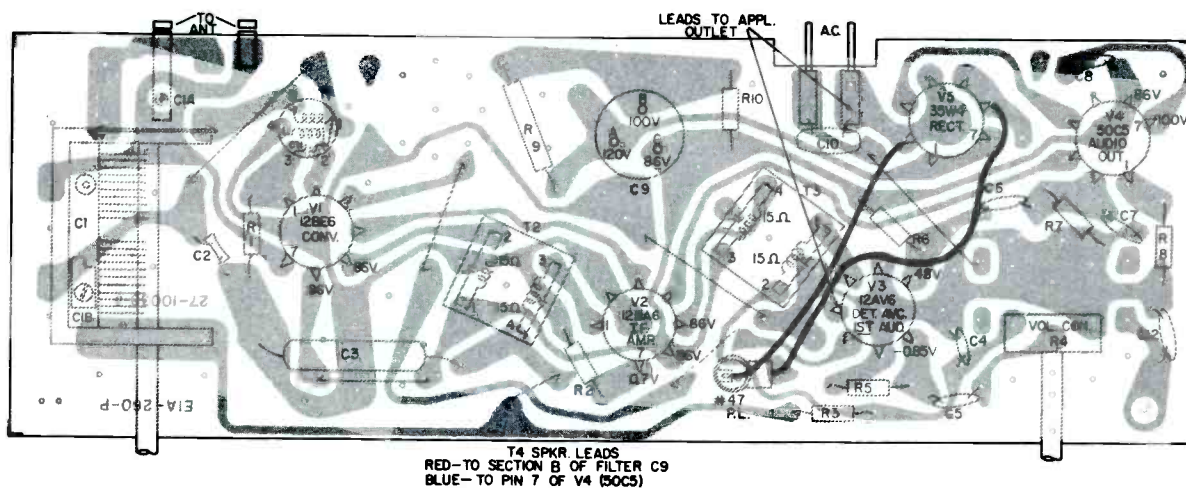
Bottom View of Perma Circuit Component Layout Model K-785 (Layout Model K-858 is similar.)
